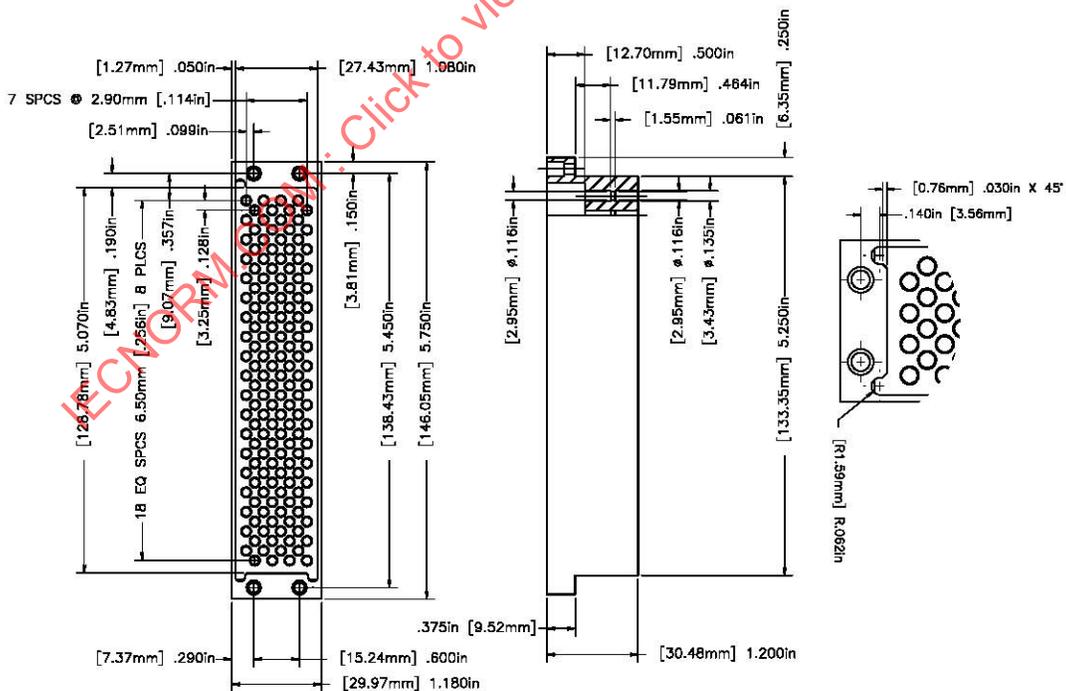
Power module, 2 slot, 152 position for 23 A contact, fixture housing physical layout
